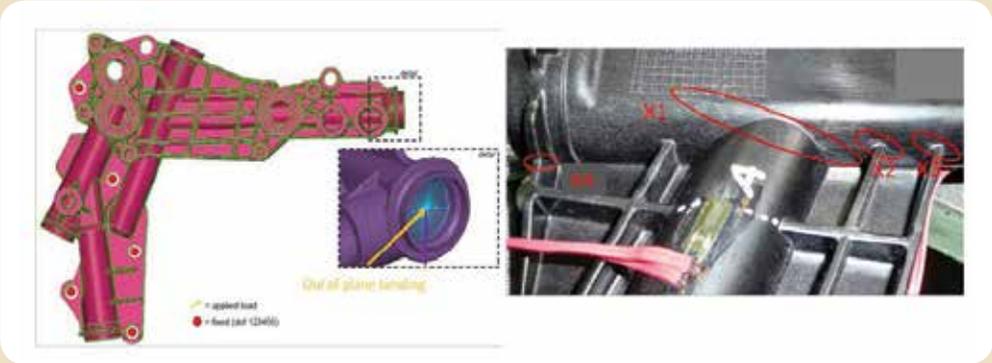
Oil cooler bracket component with indications about the load setup (left); Crack locations recorded during the fatigue tests (right).
